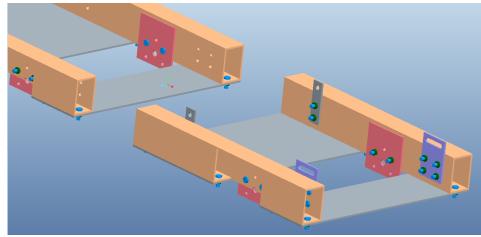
Vehicle version 2 lifter support pieces and wheel connector plates added to the assembly.
